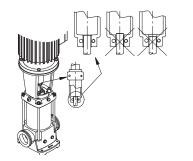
Coupling adjustment clearance CR(N) 32, 45, 64, 90, 120, and 150
